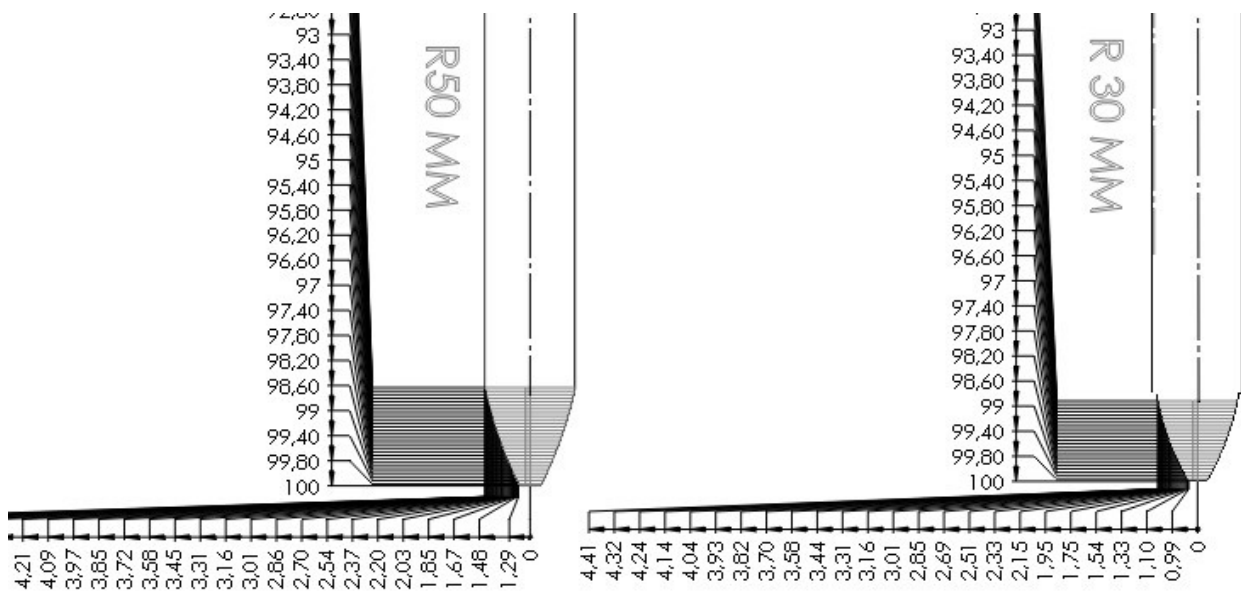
The drawing of grinding wheel outline with marked dimensions
